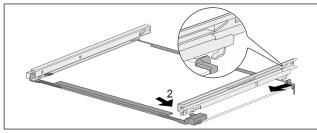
Attachment on the right moulded ribRemove moulded rib attachment sideways.
